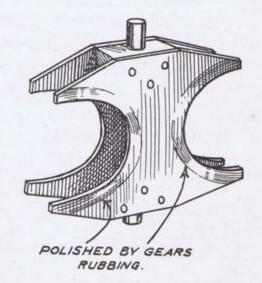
Fork, showing Pegs and Blades, which should be examined for Wear.
